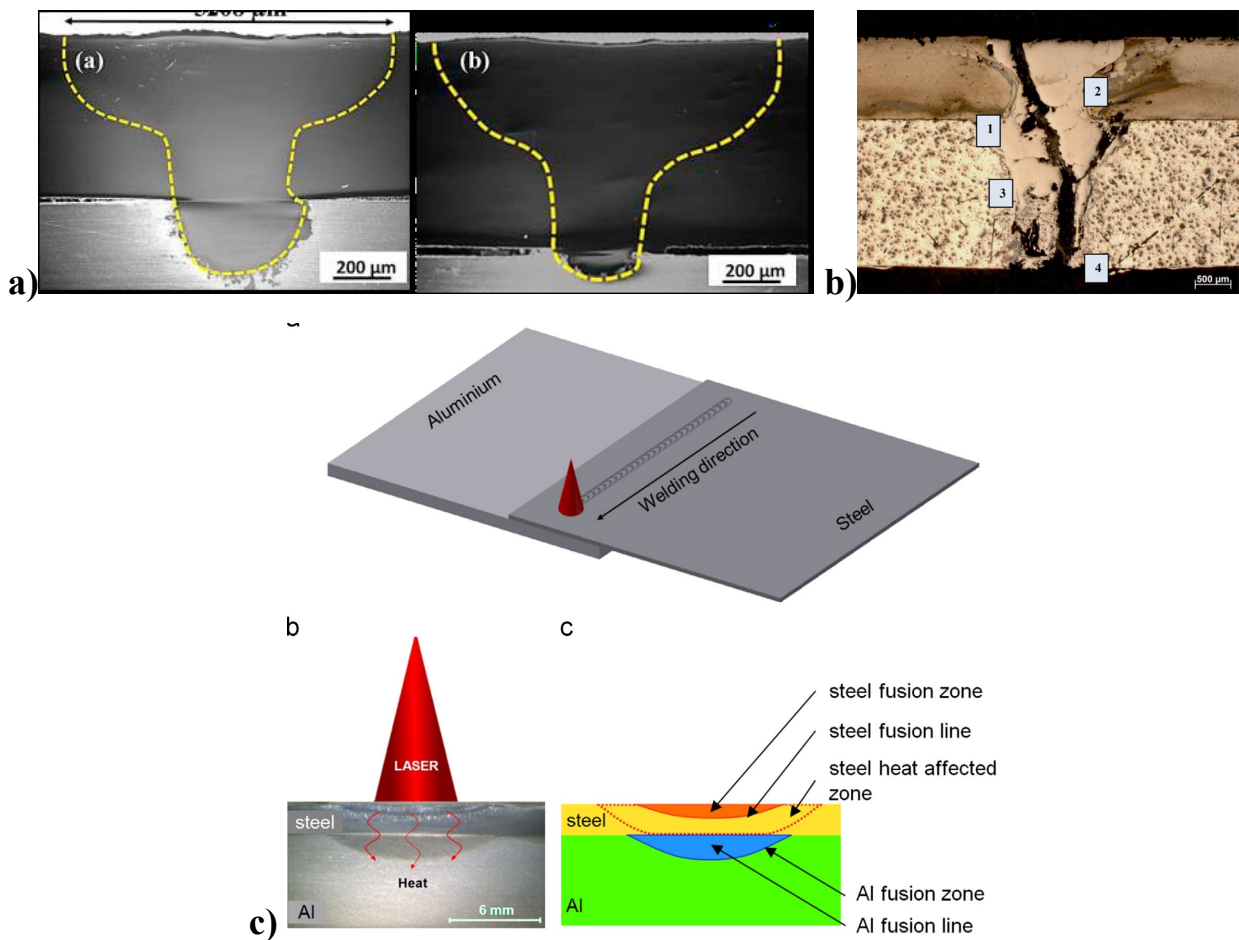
Laser welding of steel with aluminum: a) – welding of thin sheets of steel and aluminum alloy with a slotted seam [5]; b) – butt welding of bimetal aluminum (EN AW-6060) – steel (DC04) [6]; c) – welding-brazing of a part made of XF350 steel ($\delta=2$ mm) to a part of aluminum alloy AA5083-H22 ($\delta=6$ mm) [7].
